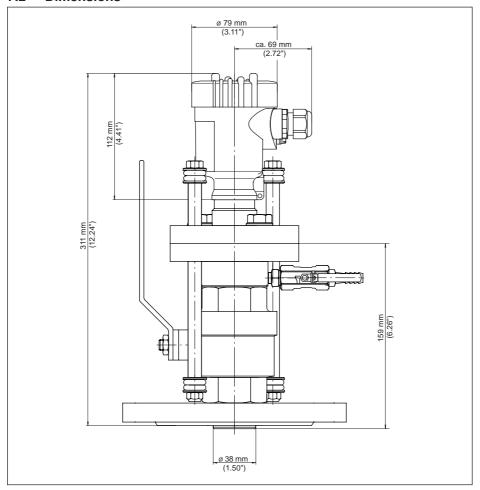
Ball valve fitting acc. to ZB 2553 with pressure transmitter VEGABAR 82
